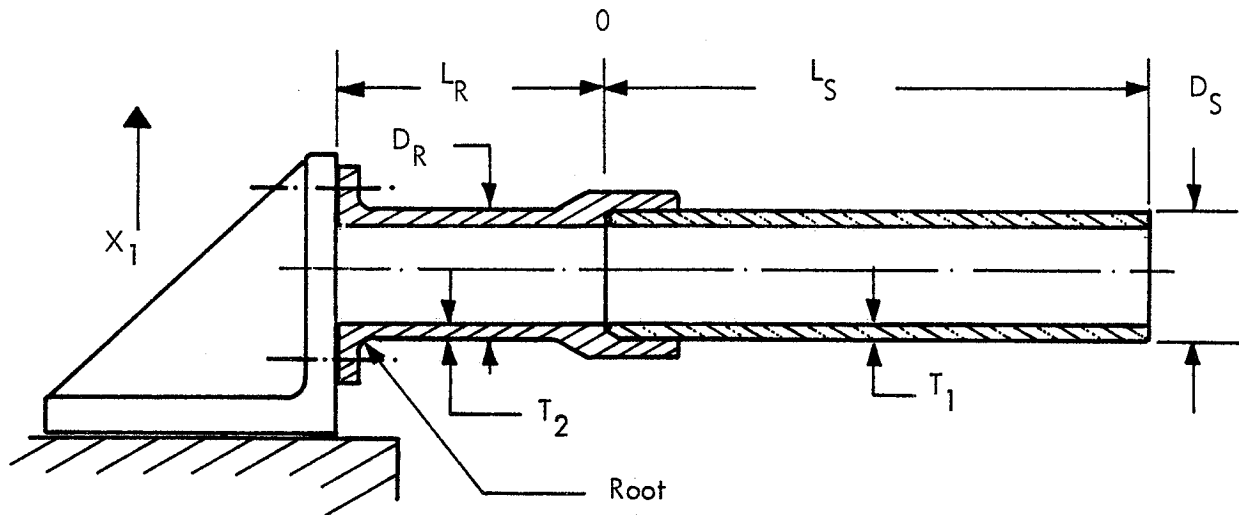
TOOLING ARRANGEMENT FOR WELDING DISSIMILAR METAL TUBULAR ASSEMBLIES
